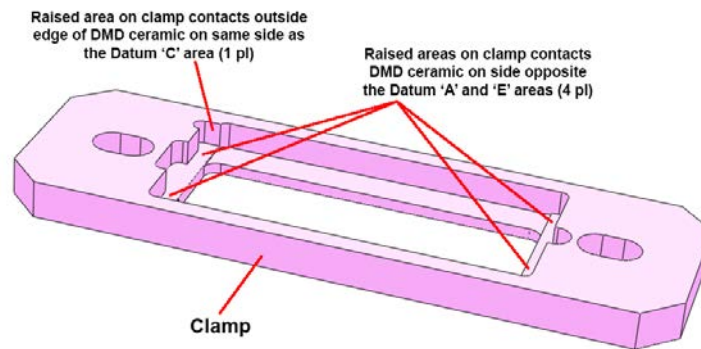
Clamp Datum 'A' and 'E' Contact
